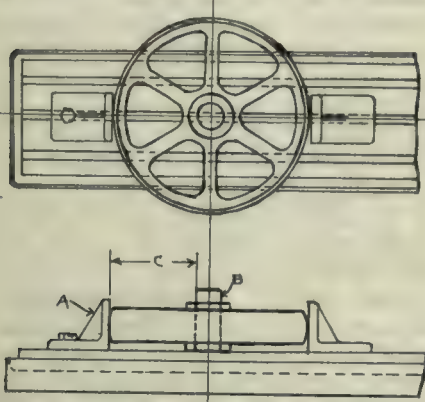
A METHOD USED FOR MEASURING A LARGE PULLEY.
